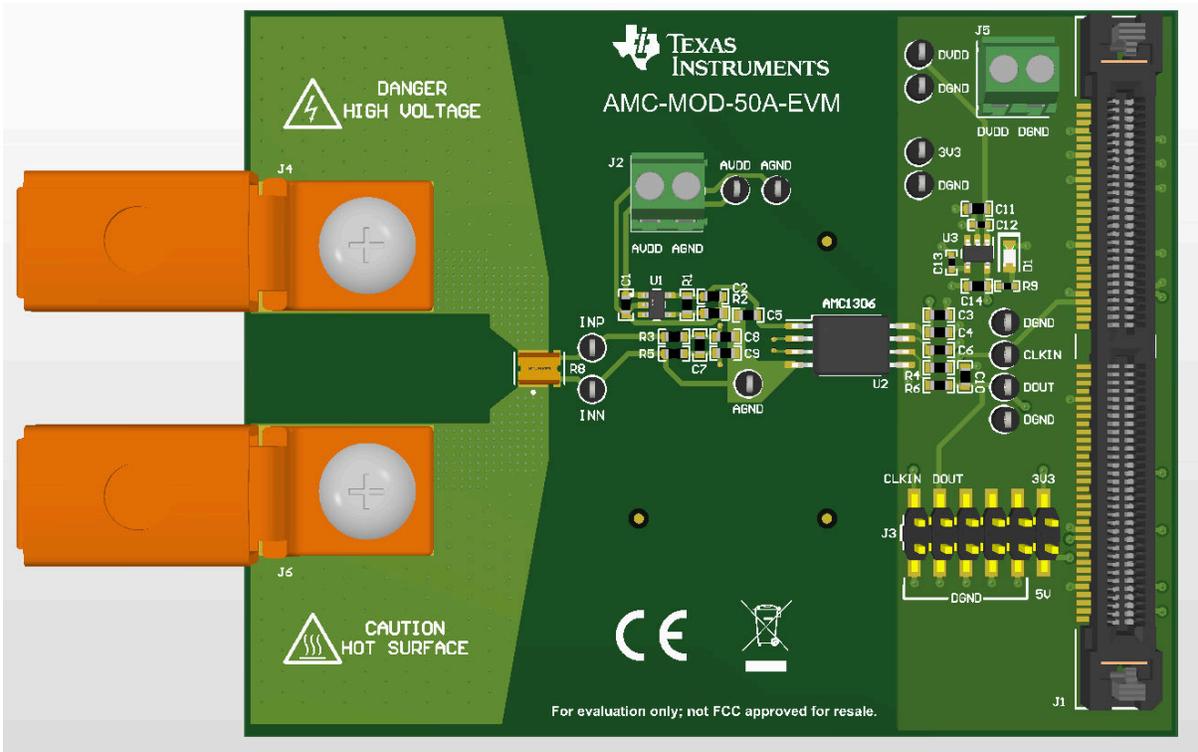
AMC-MOD-50A-EVM Top PCB Drawing
